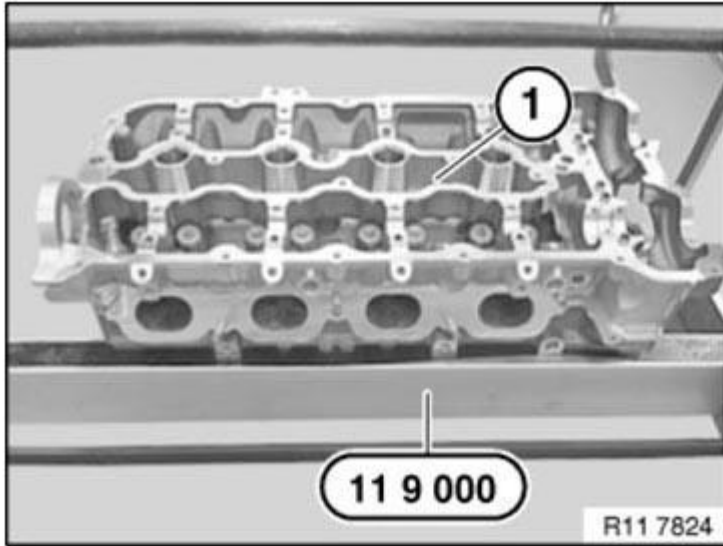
Mounting Cylinder Head On Special Tool 11 9 000
